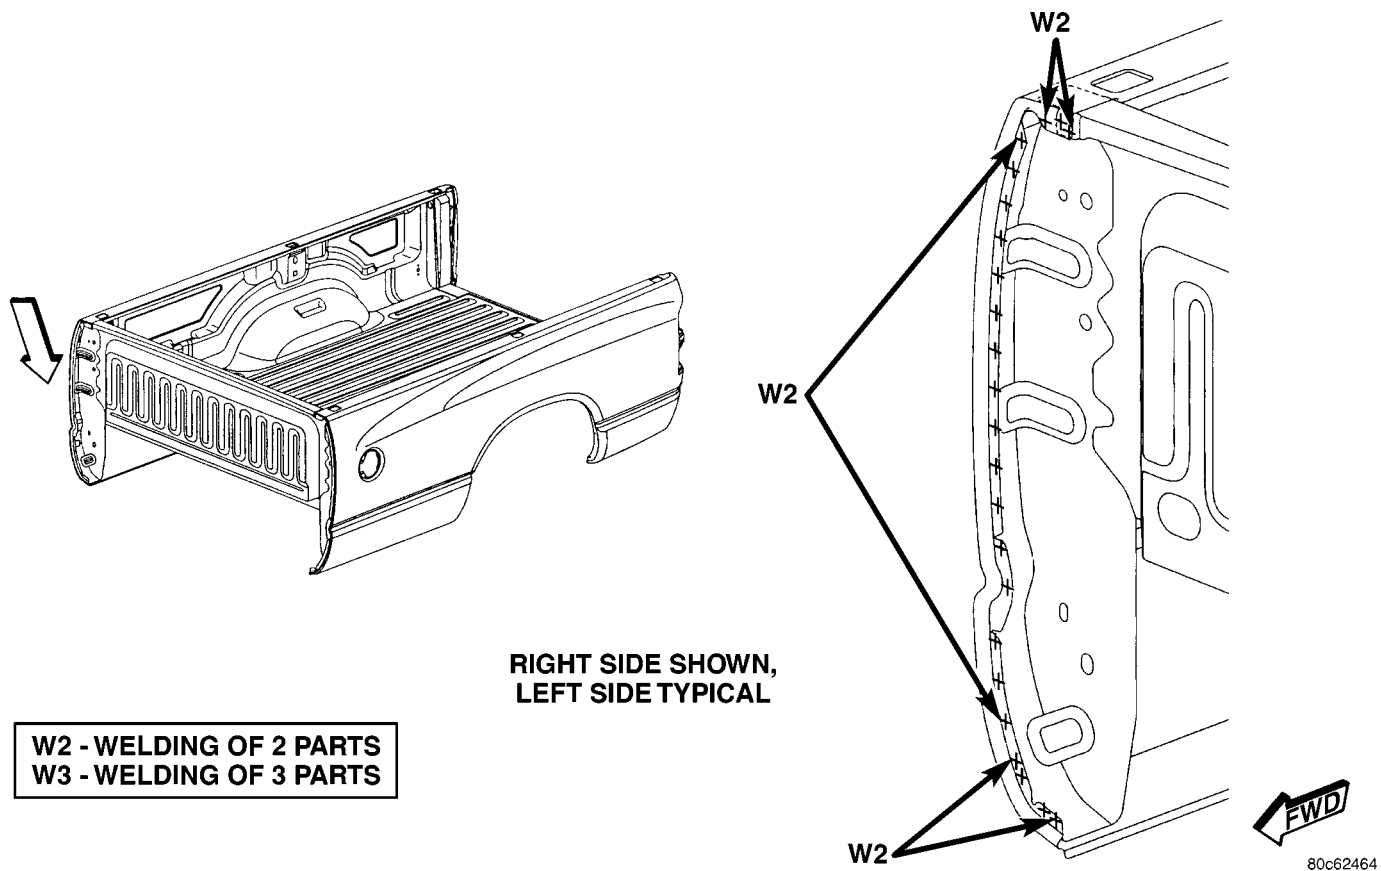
OUTER BOX SIDE PANEL - LONG CARGO BOX ONLY
